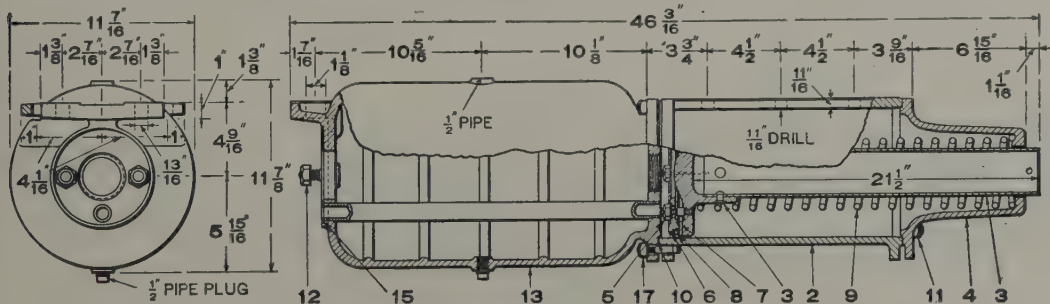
8 in. by 12 in. Freight Brake Cylinder and Auxiliary Reservoir Combined.
